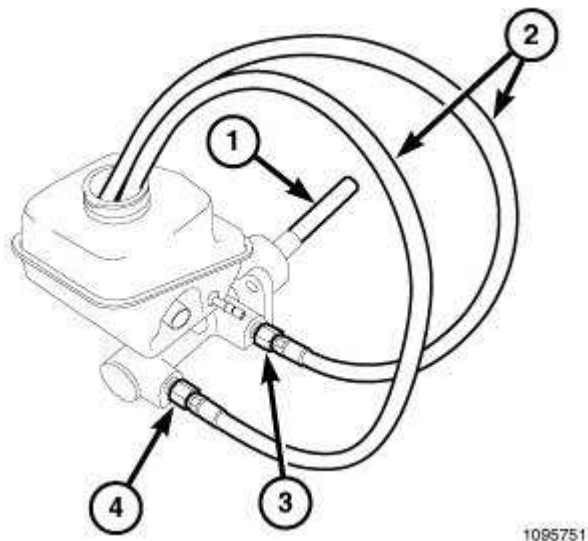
BLEEDING TOOLS ON MASTER CYLINDER
